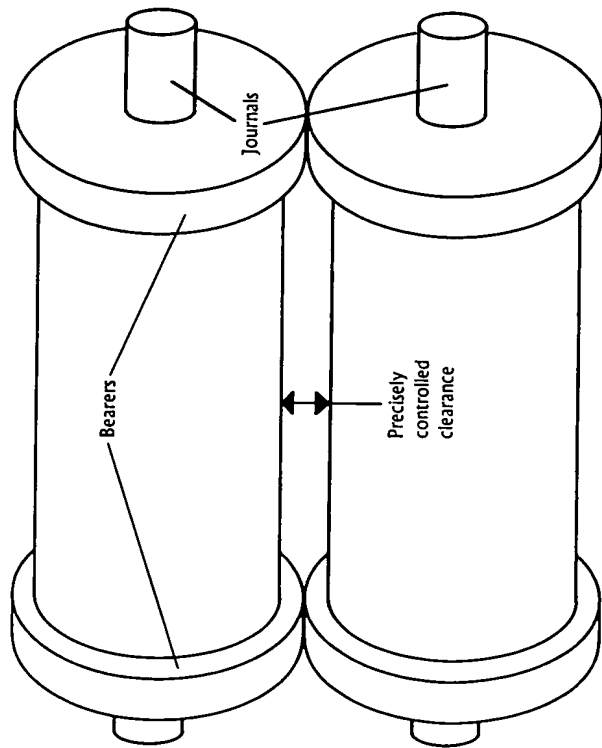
Typical plate and blanket cylinder arrangement. Running on bearers produces a precisely controlled clearance between cylinder bodies.
